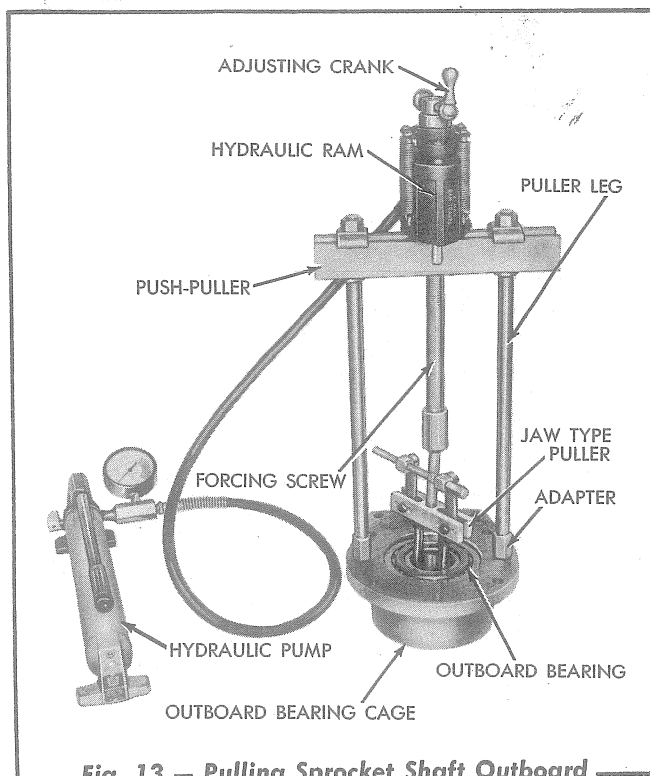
Pulling Sprocket Shaft Outboard Bearing from Bearing Cage
